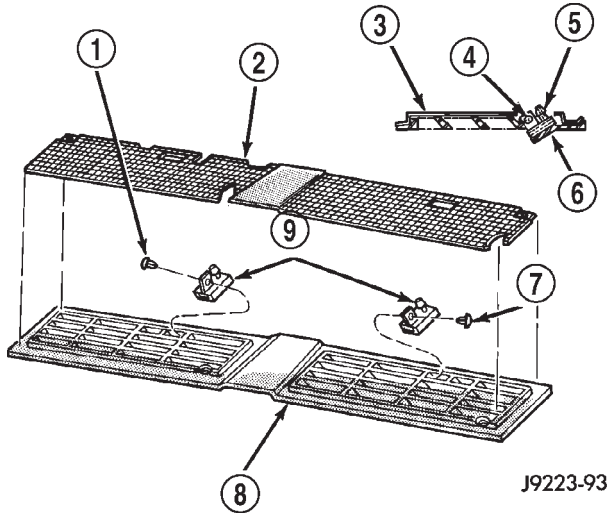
Cowl Grille, Screen & Washer Nozzles
